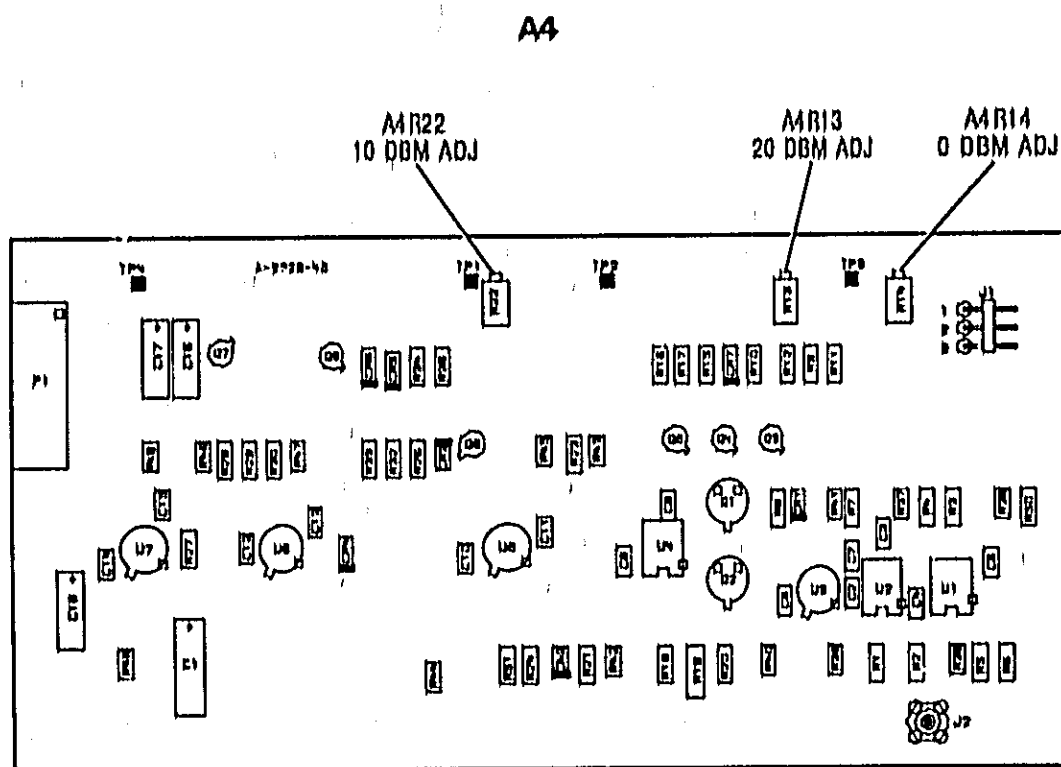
Signal Conditioning Assembly Adjustment Locations
